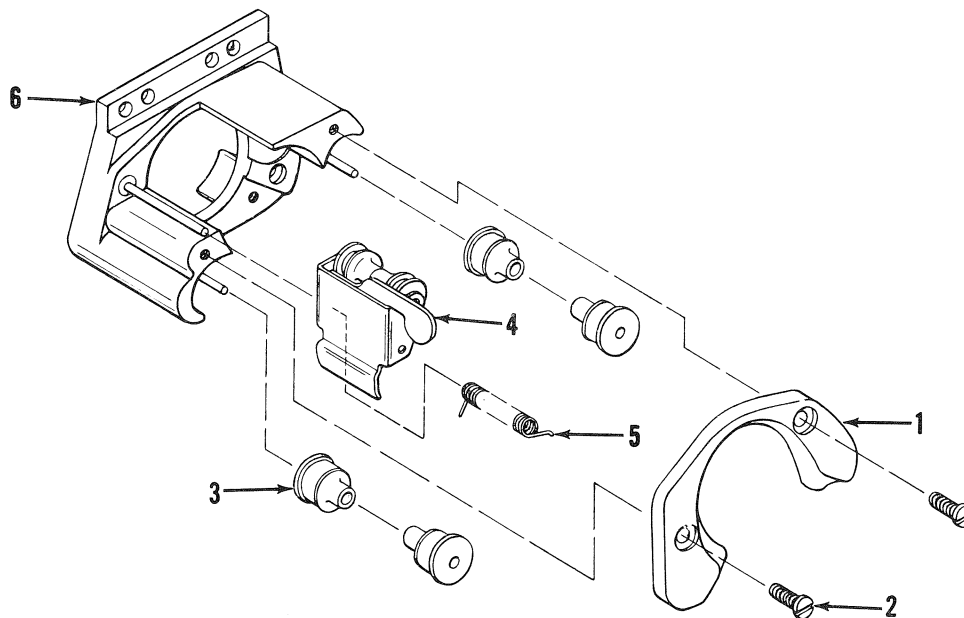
SHOE ASSEMBLY - TAKE-UP SPROCKET
